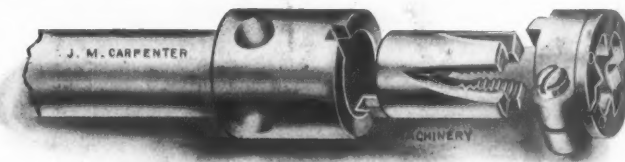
A Simpler Form of the J. M. Carpenter Threading Die-holder
